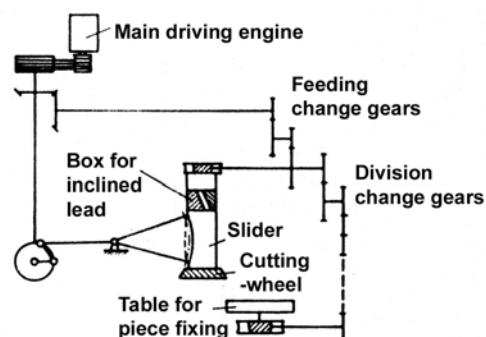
Kinematic scheme of the gear wheel mortising machine with cutting-wheel.
